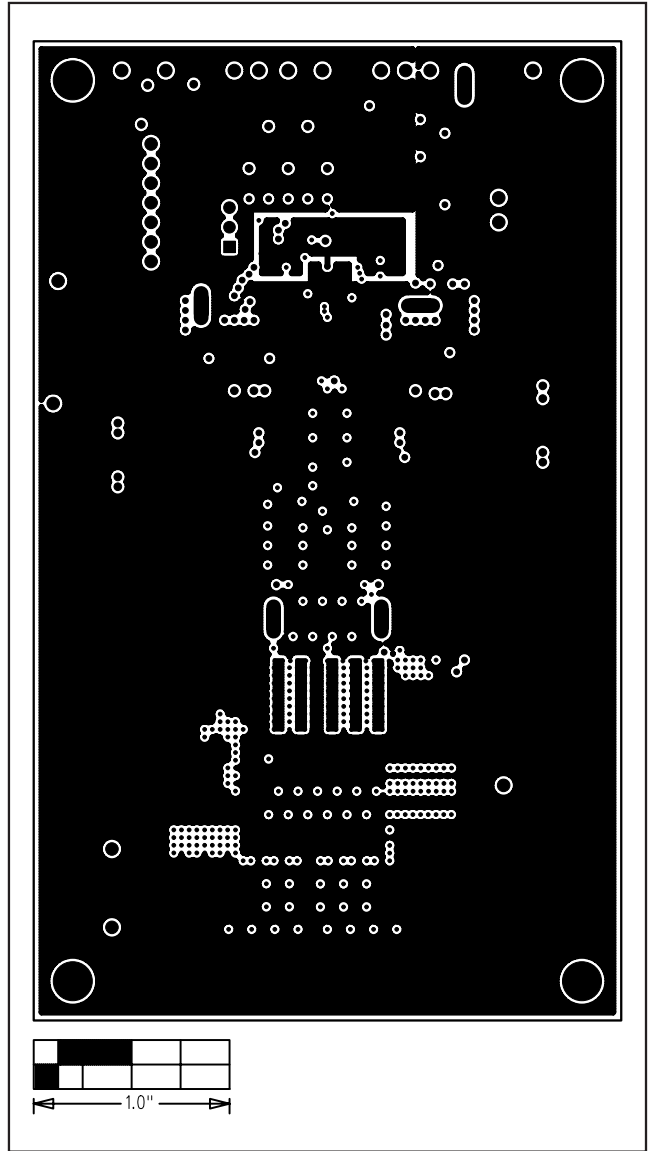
MAX17082 EV Kit PCB Layout—Internal Layer 5 (AGND/PGND Layer)
